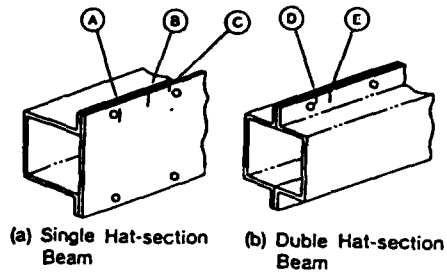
Fatigue Crack Mode in IN-plane Bending
